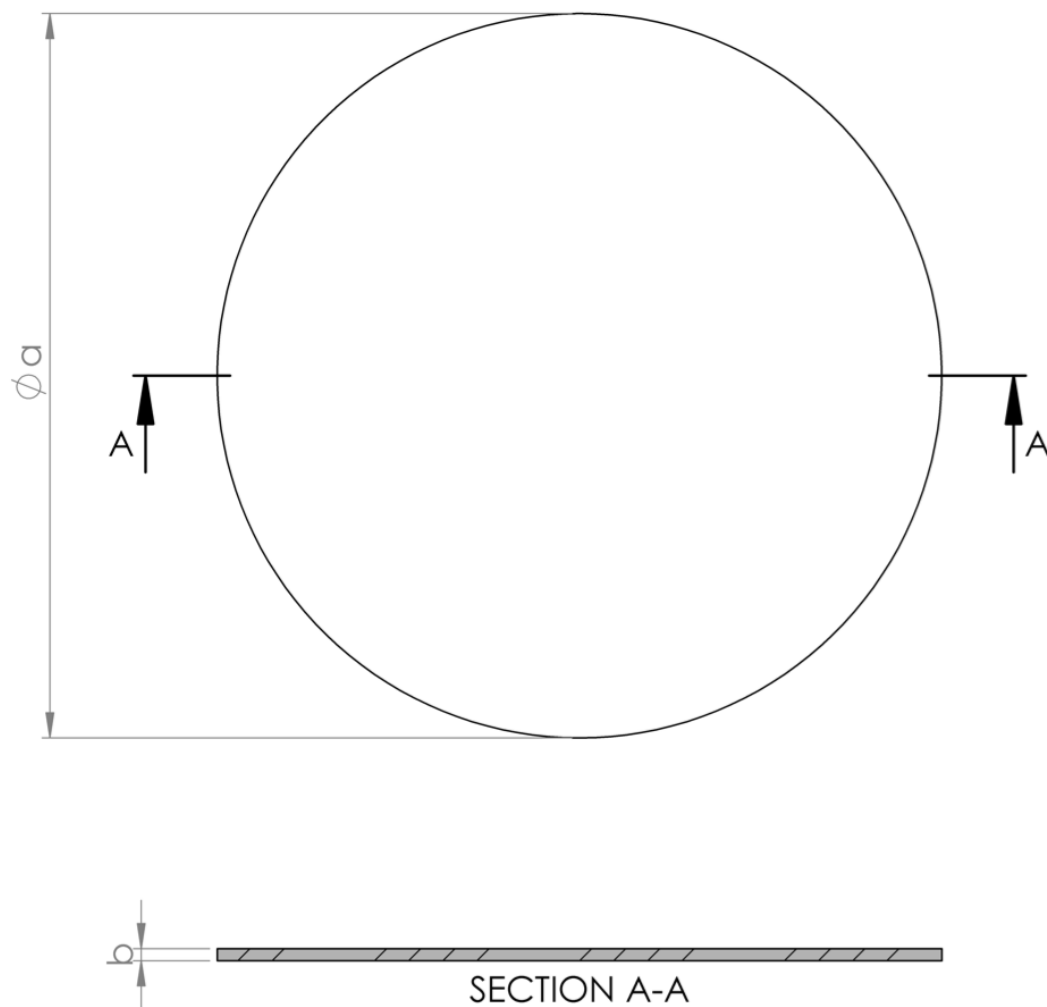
Drawing of the polyethylene moderator and reflector plates.
